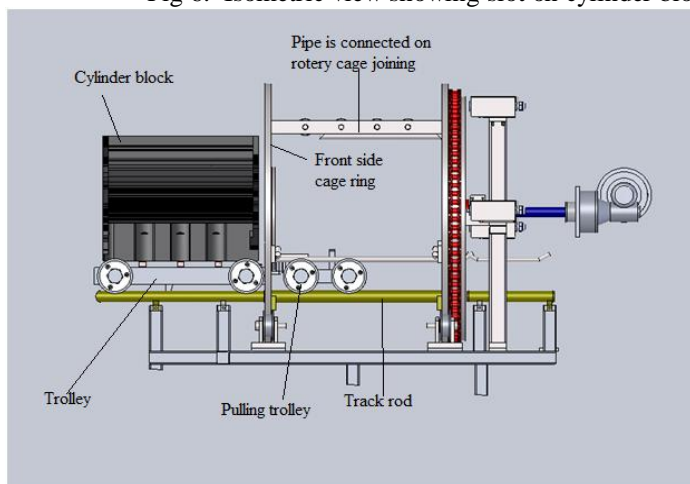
Front view showing pipe is connected to rotary cage joining plate
